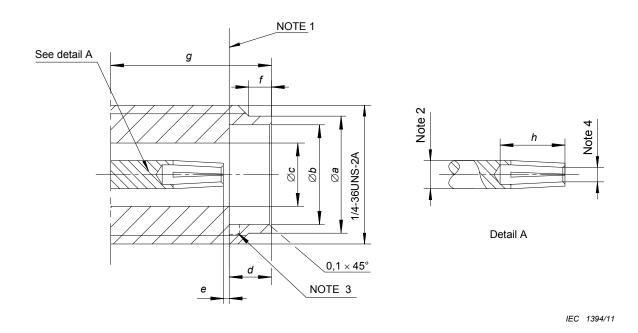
Connector with socket-centre contact (for dimensions and notes, see Table 2)
